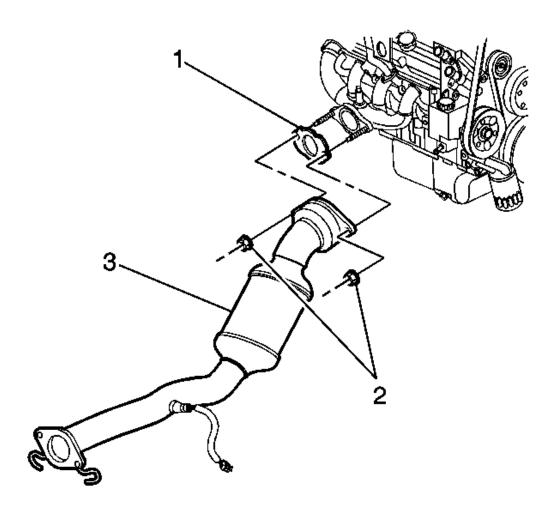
Right Exhaust Manifold & Catalytic Converter Pipe Courtesy of GENERAL MOTORS CORP.
